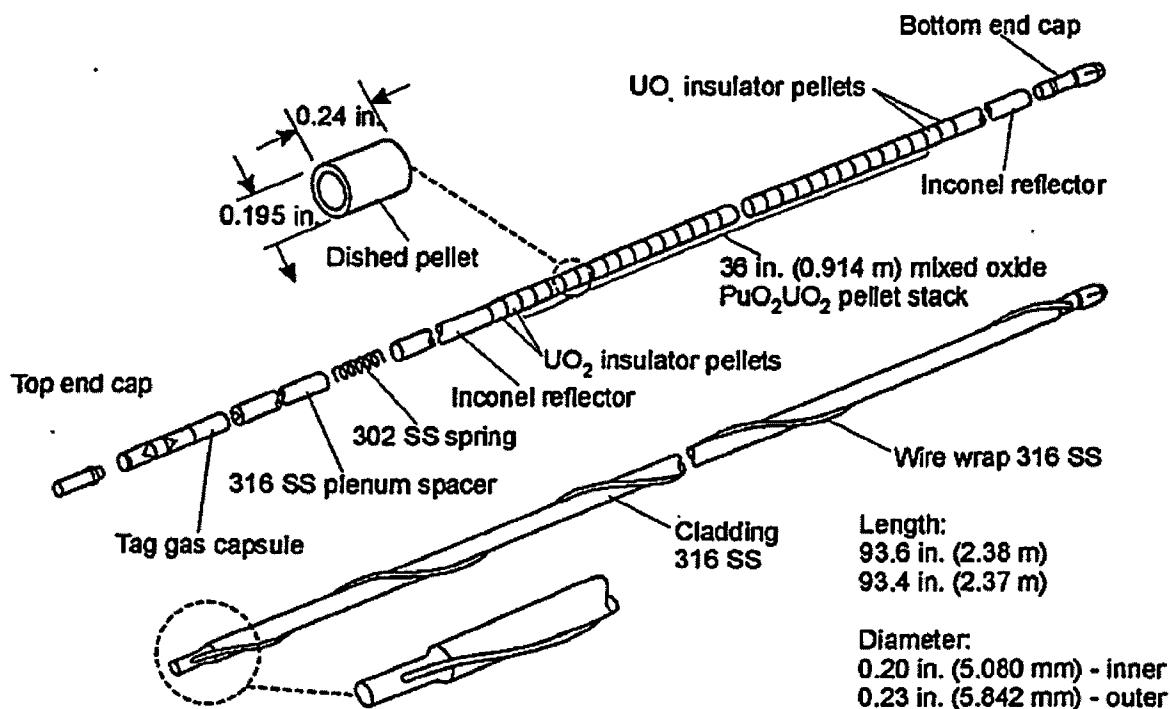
Simplified Axial View of a Standard FFTF Driver Fuel Assembly Fuel Pin
